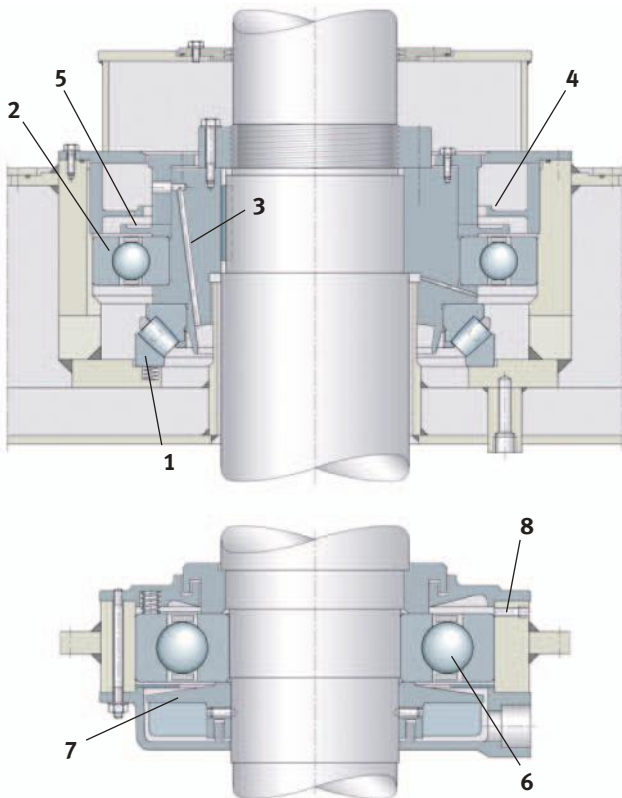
shows the upper and lower bearing position in a vertical electric motor. The upper bearing position is fitted with an FKB housing unit as a complete solution.
